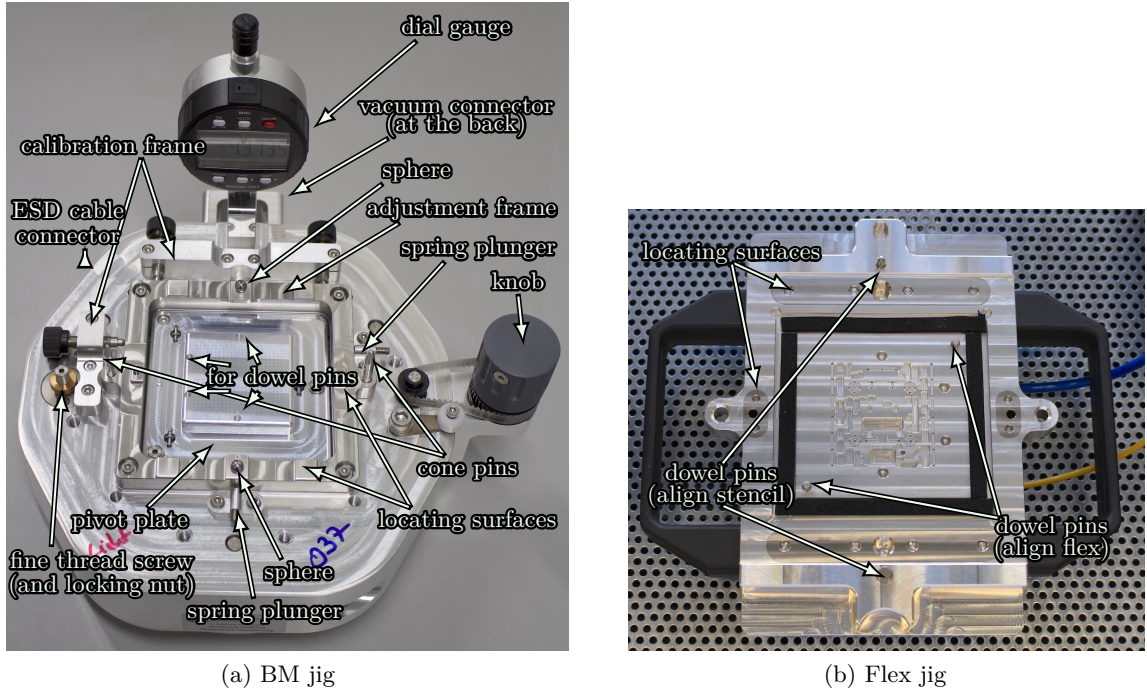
Detailed structures on the BM jig and flex jig. The BM and flex chucks are the surface on the pivot plate of the BM jig and the surface at the centre of the flex jig.
